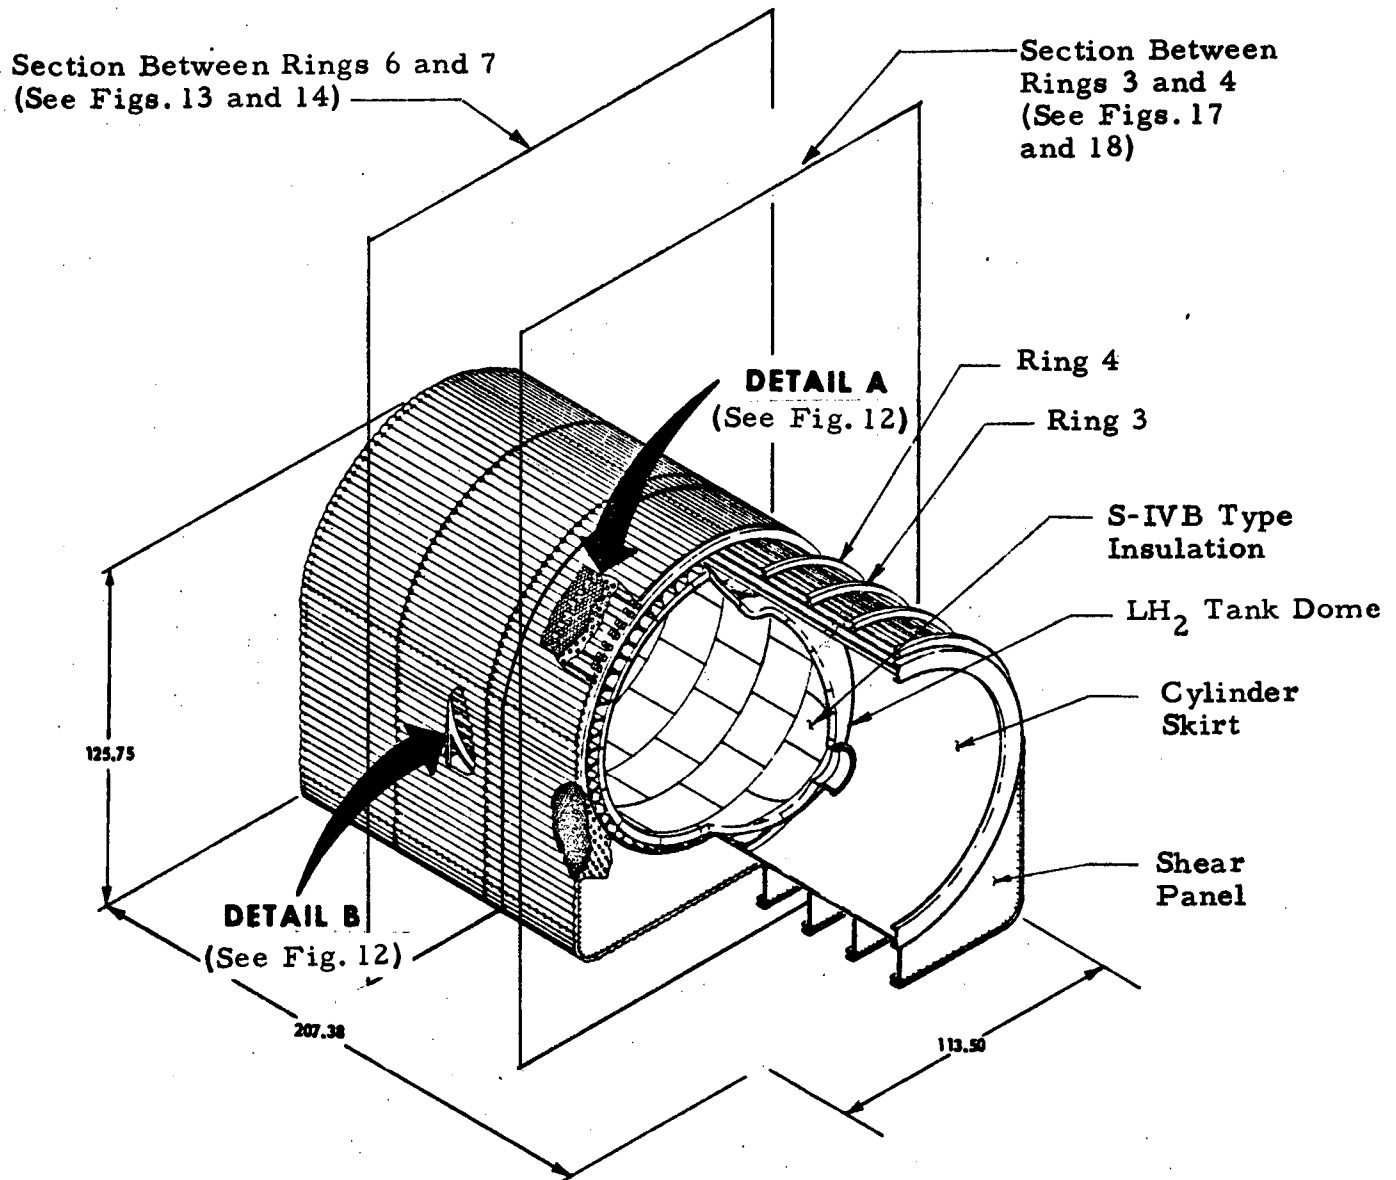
Isometric Cutaway View of Prototype I, Test Article 1
